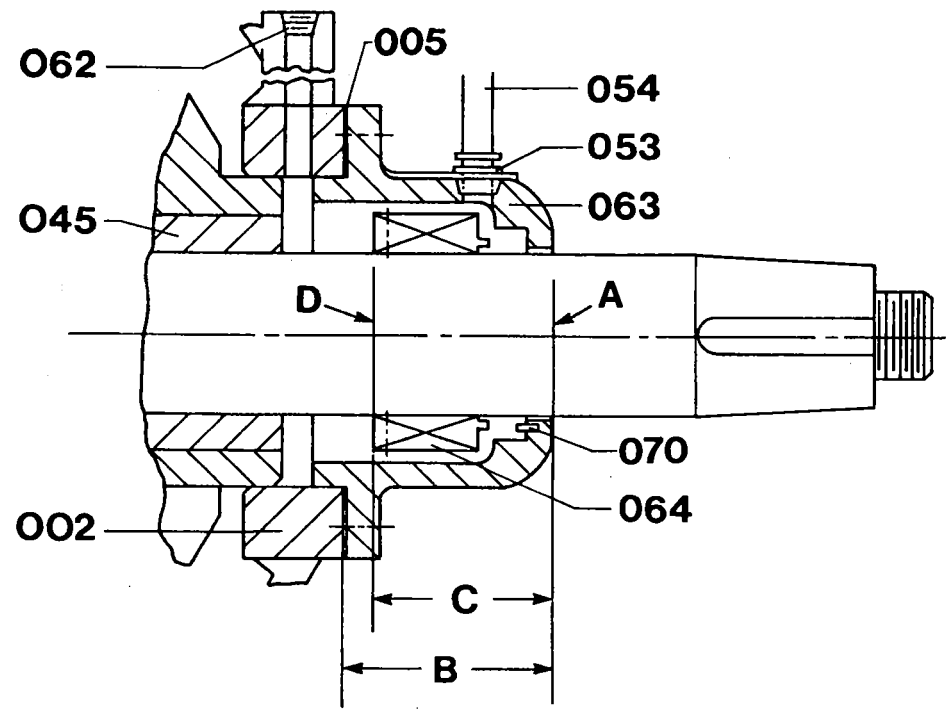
Position Setting of Seal Rotating Assembly (Crane 9, 9M and Borg-Warner QW)
